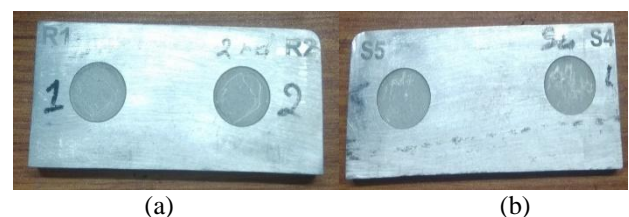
Al7075-T6 after machining in (a) stationary EDM (b) rotary tool EDM
